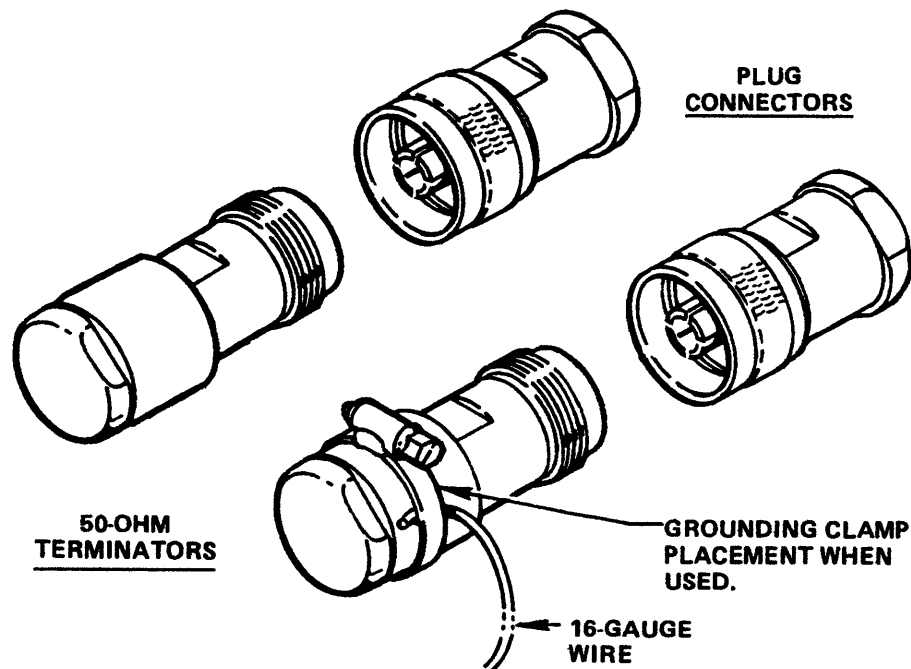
IEEE 802.3 Coaxial Cable Terminator Kit
